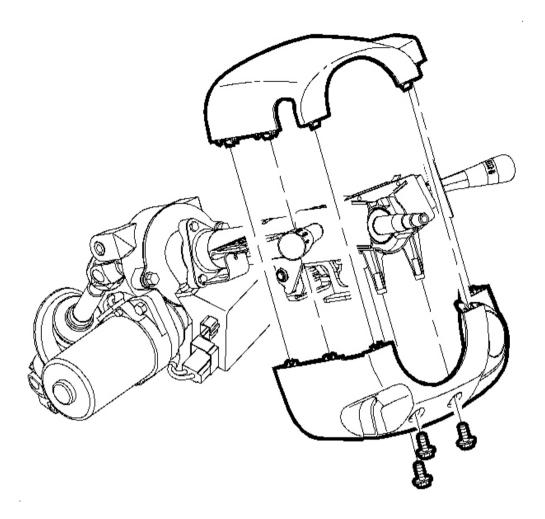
Upper & Lower Shrouds Courtesy of GENERAL MOTORS CORP.
